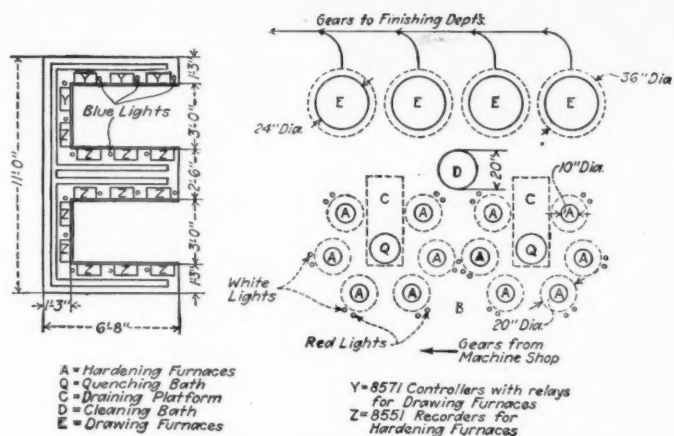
Layout of hump method heat treatment equipment in the machine shop of an automobile gear plant
